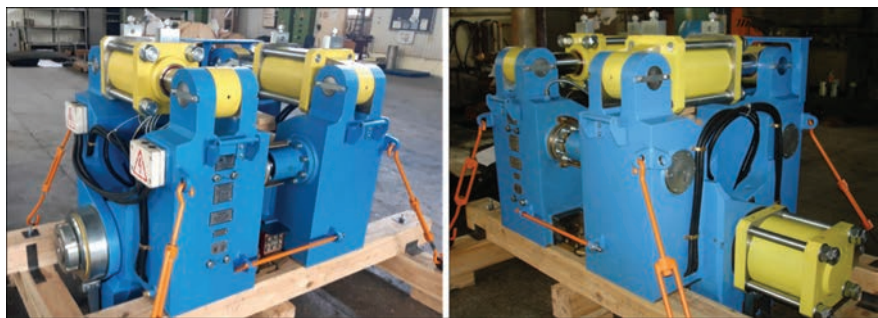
Welding head of the RW1060 machine for FBW of railway rails in hard-to-reach locations
